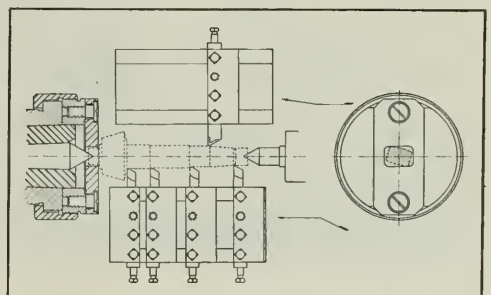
Finishing the Shank of the Stem Bevel Gear shown in Fig. 1
